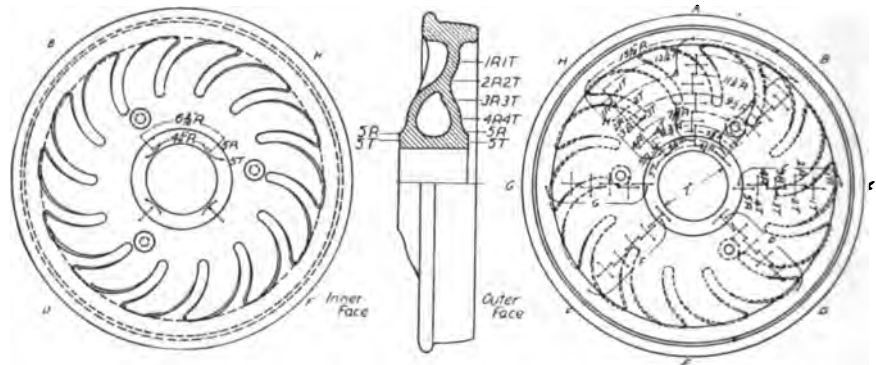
LOCATION OF GAGE-LINES ON 33-IN. 725-LB. M. C. B. WHEEL NO. 671,237
